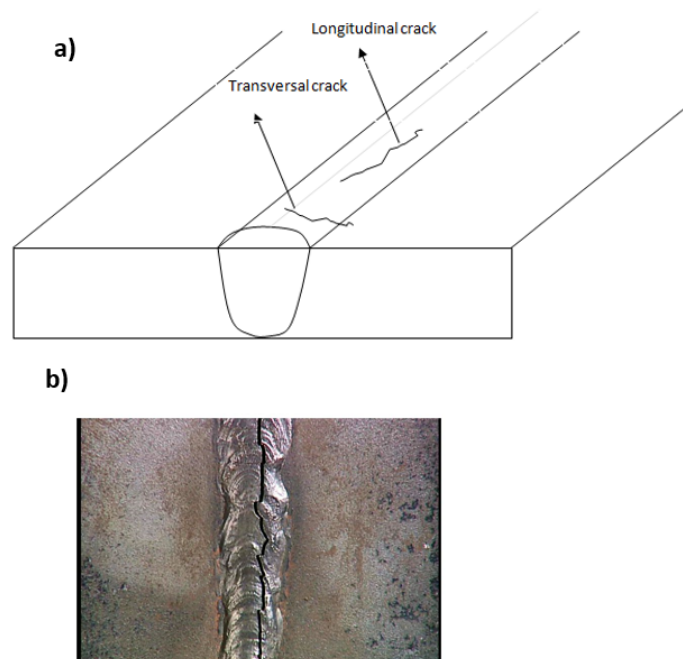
a) Representation of the two types of surface cracks (transversal and longitudinal) along the weld; b) Image of a real surface crack [14].
